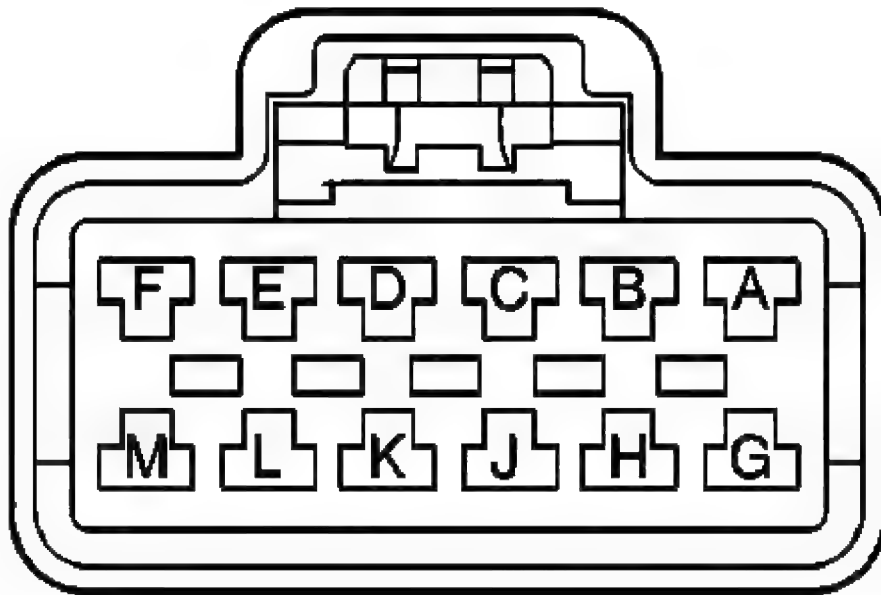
Front Climate Control Seat Module C1 (KB6) Connector End View
